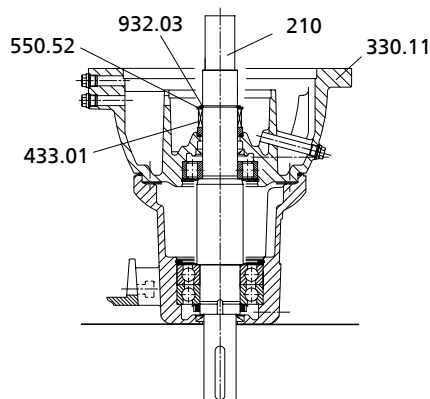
Drive-end mechanical seal (bearing brackets S01 - S07)
